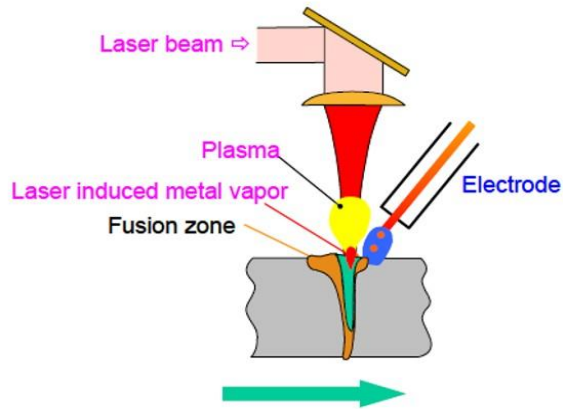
Schematics of laser-arc hybrid welding
